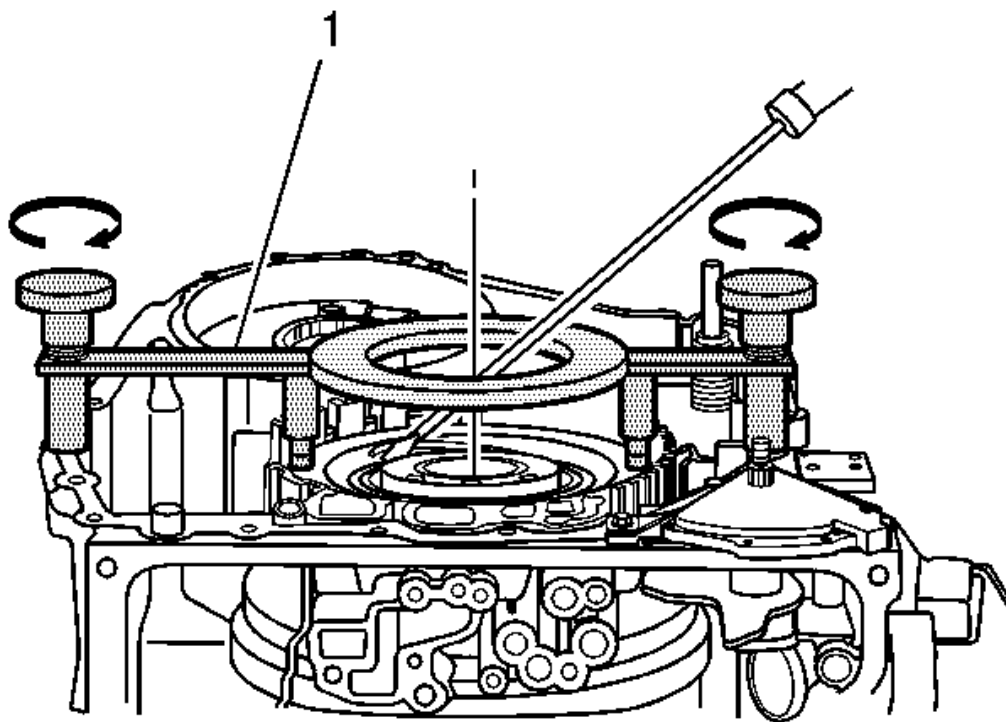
Identifying Low & Reverse Clutch Piston
